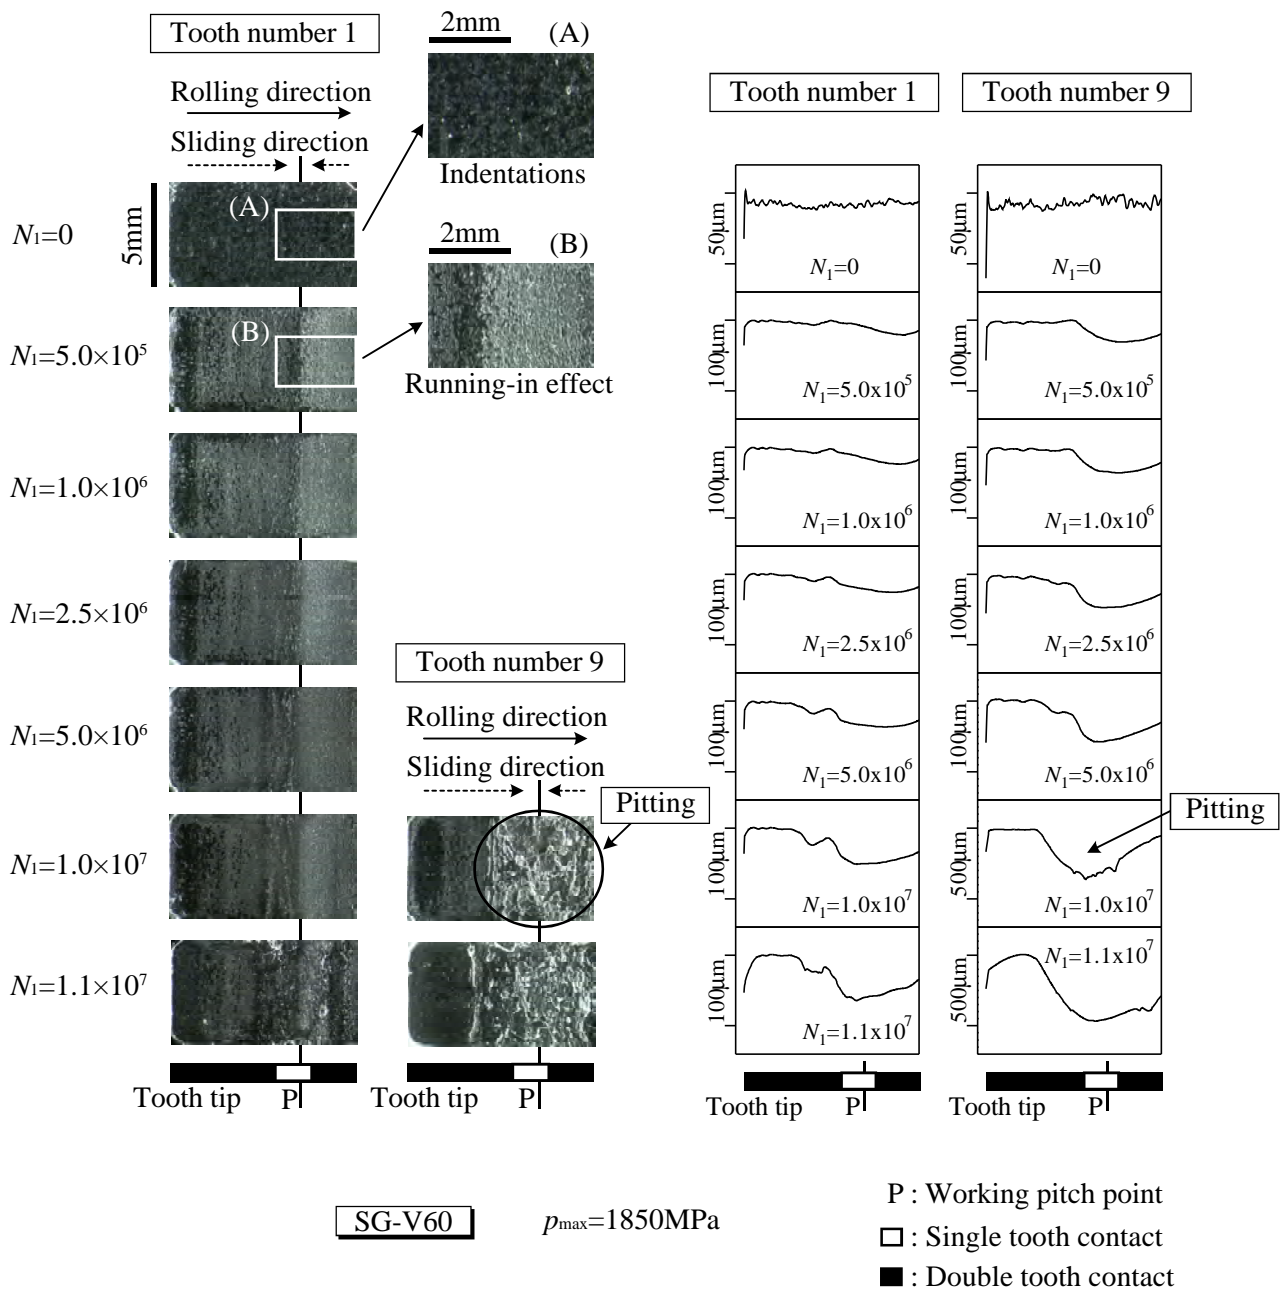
Tooth surface photographs and tooth profiles of failed teeth during fatigue test
